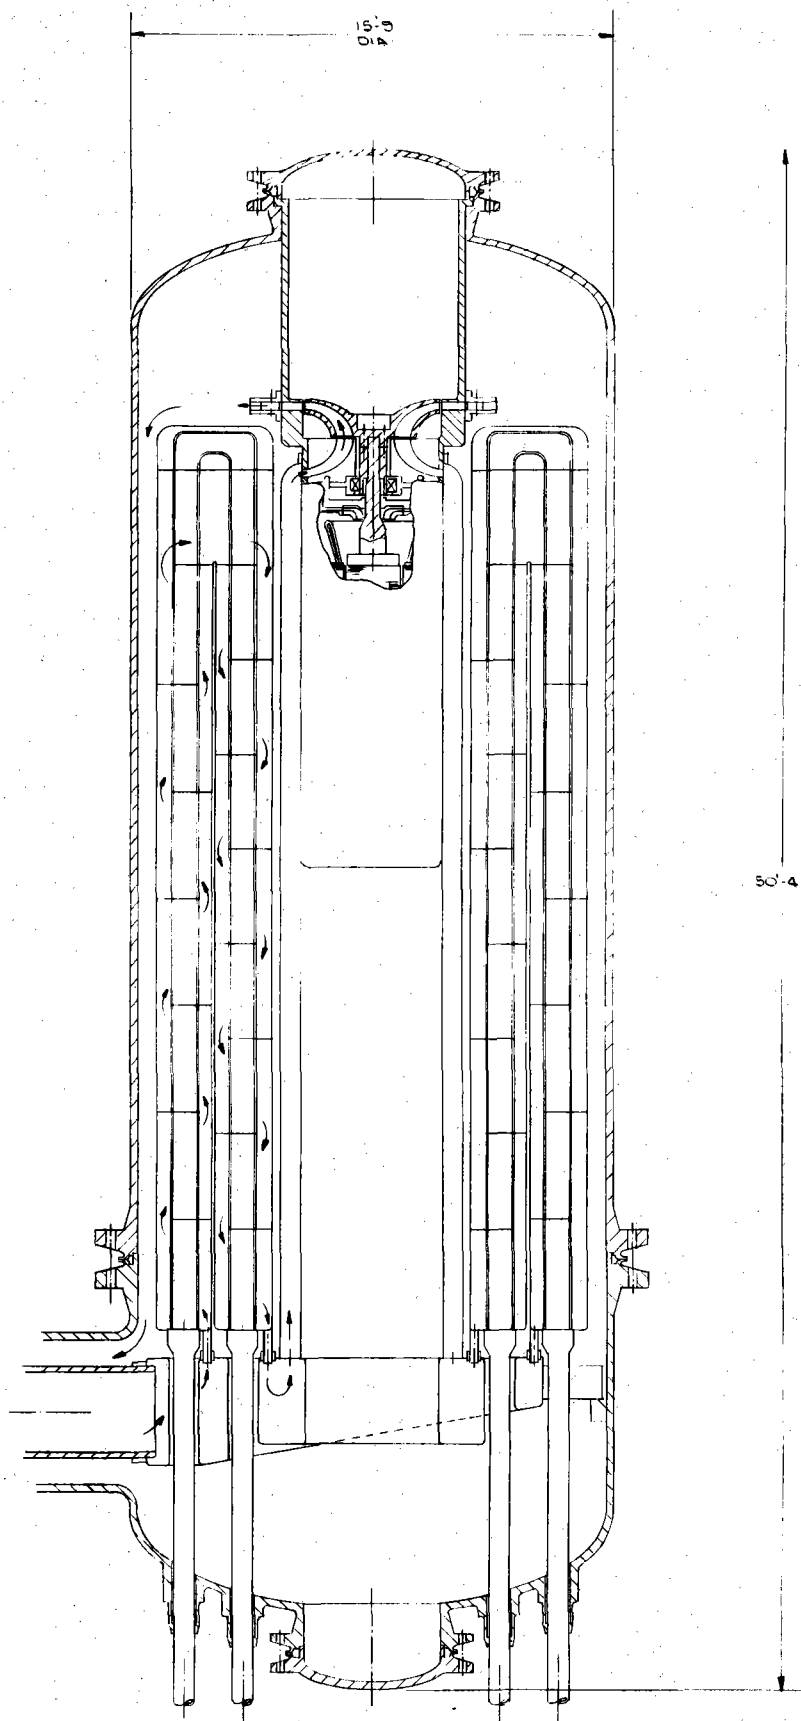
Internal Circulator Design Variation of U-tube IHX Assembly.
